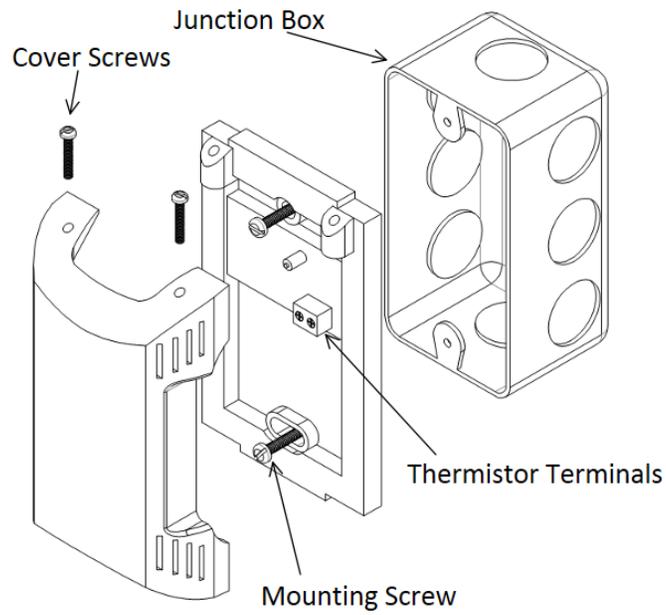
Space Thermistor Detail (Plastic Housing Wall Mount)
